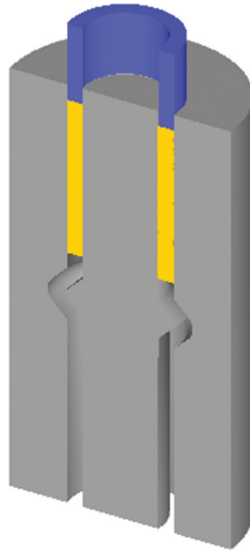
A sliced TCAP set-up showing the workpiece, top die, bottom die and the mandrel.
